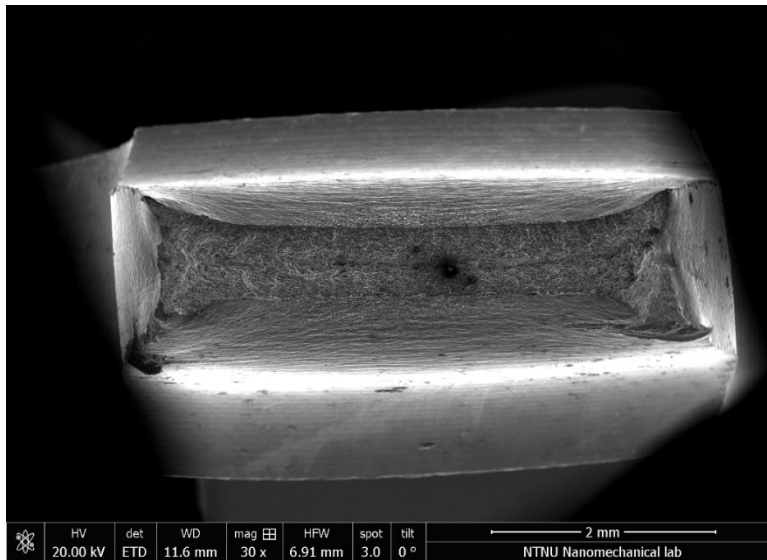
Additional SEM image of the fracture surfaces at low magnification for a selected tensile test specimen. Specimen code: 15.3. Magnification 30x.
